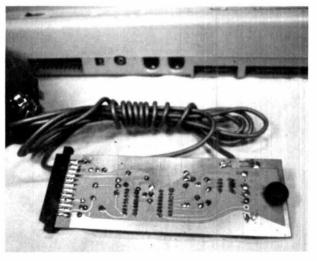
Bottom view of the interface PC board. The pins of the PC card edge connector are soldered to the contact fingers.
